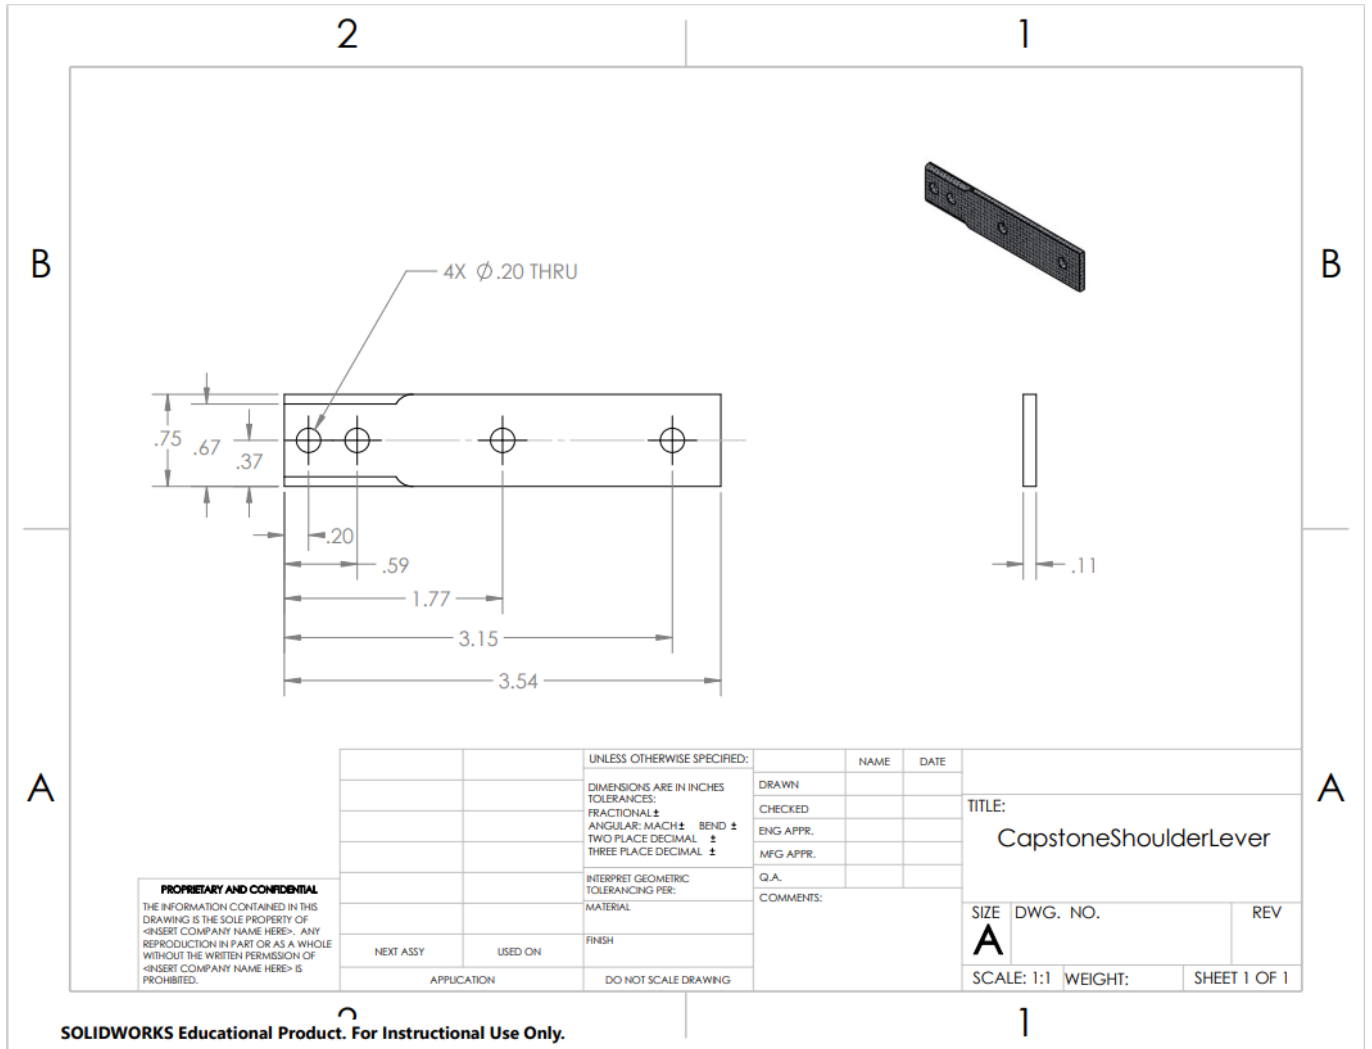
Shoulder Lever Drawing (Not in Final Design)
